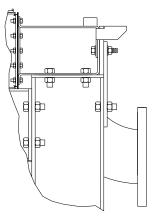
C - SIDE VIEW OF TANK WITH SURGE TANK BRACKET AND LIFTING LUG
